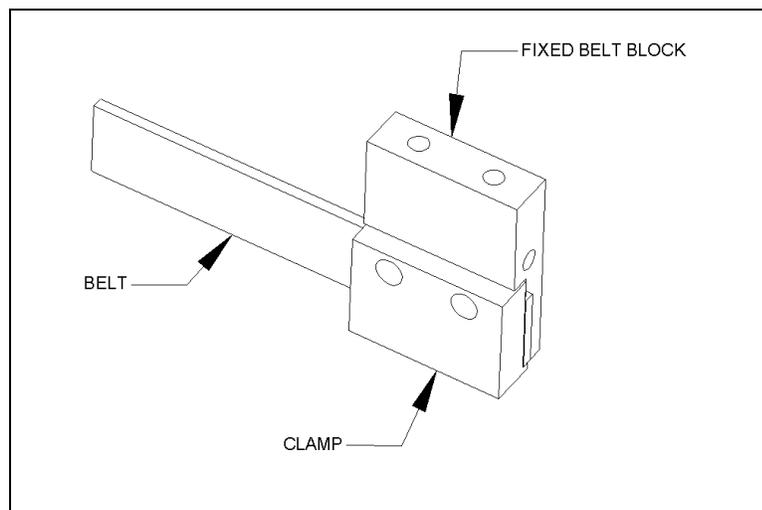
Placing the Fixed Belt Block on the Motor End of the Drive Belt
